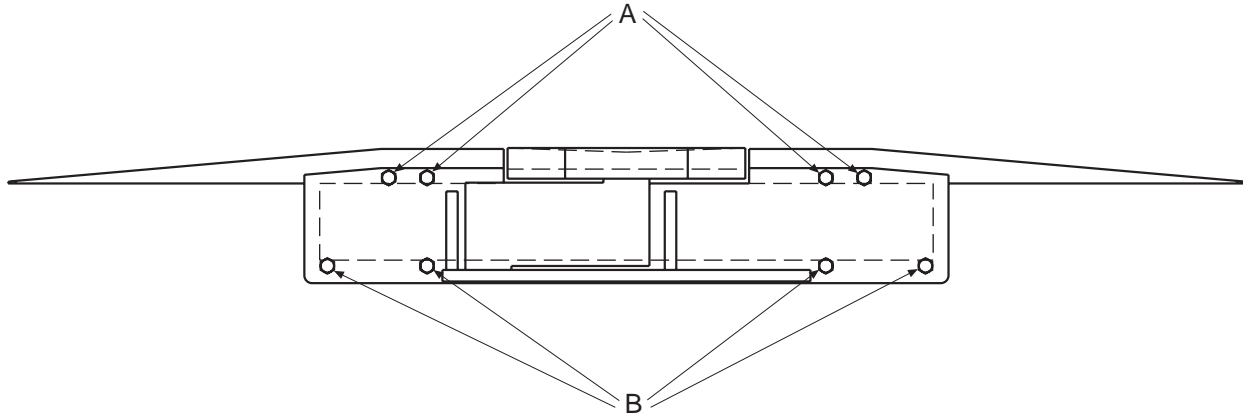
Top & Lower Bolts of Scale Mounting Brackets
